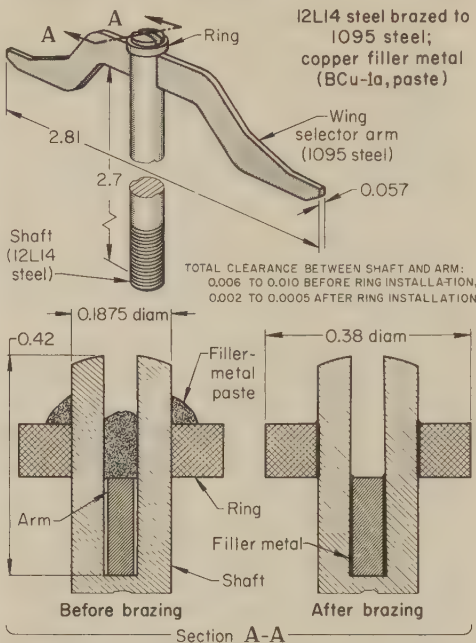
Use of a press-fit ring to obtain self-jigging in a shaft and selector-arm assembly (Example 553)
